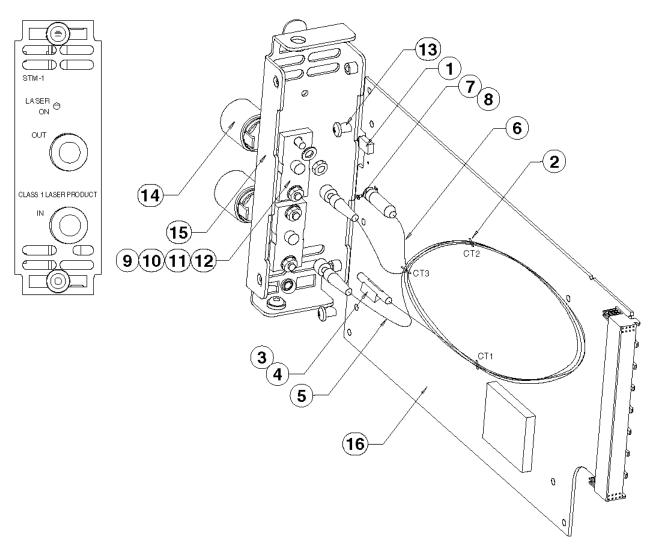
1310 nm STM-1 Optics Module - Exploded View
